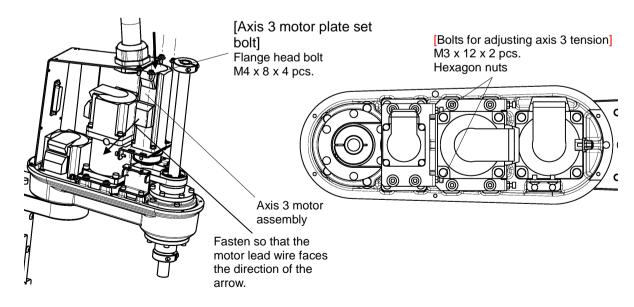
Mounting axis 3 motor assembly (KHL-300, KHL-400)
